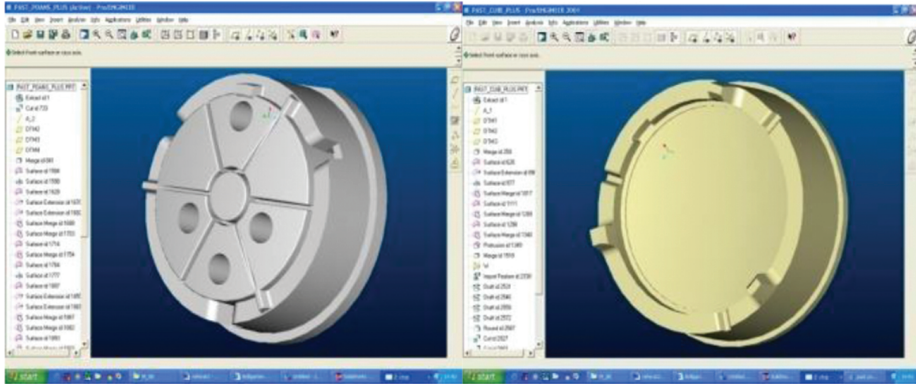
Injection moulding tools for a lid button (ProEngineer design).
